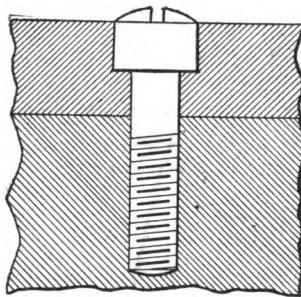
How a filister head screw sets in a hole finished with a bottoming drill
